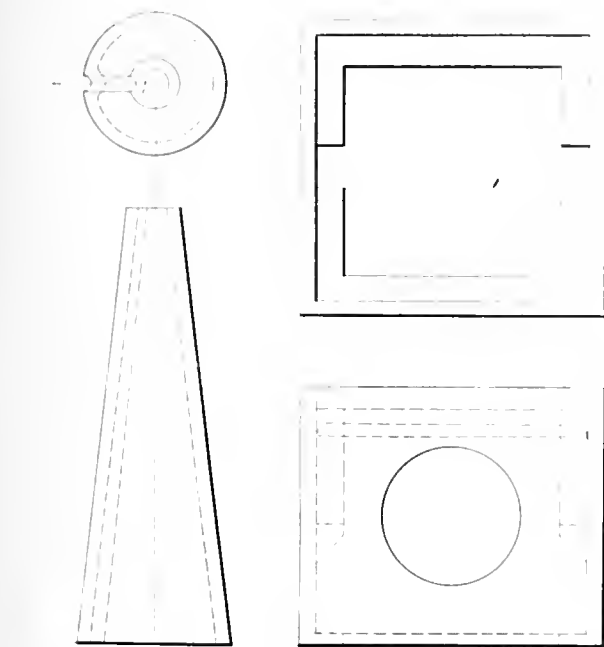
Taper Cone for Forging Rings, Collars, etc. Fig. 6. Base for Swage Blocks.
